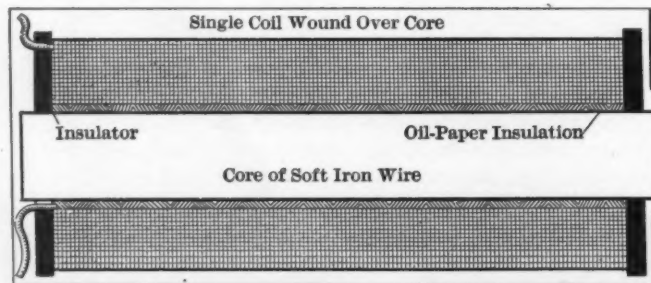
Section of a kick coil showing the method of manufacture and the relation of the soft iron wire core, paper insulation and the cotton insulated winding
